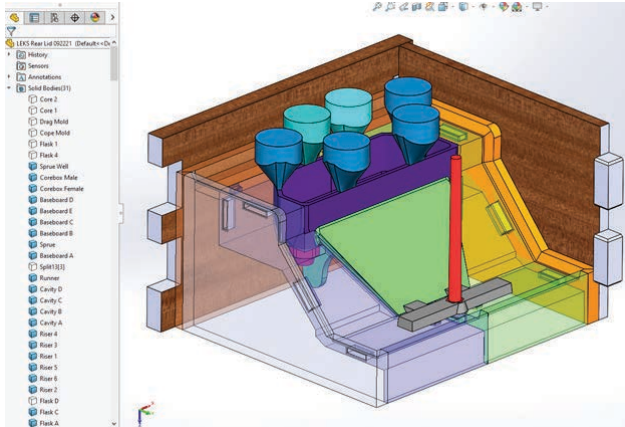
The assembly 3D model of the whole casting design of the rear lid, color-coded to indicate distinct components
